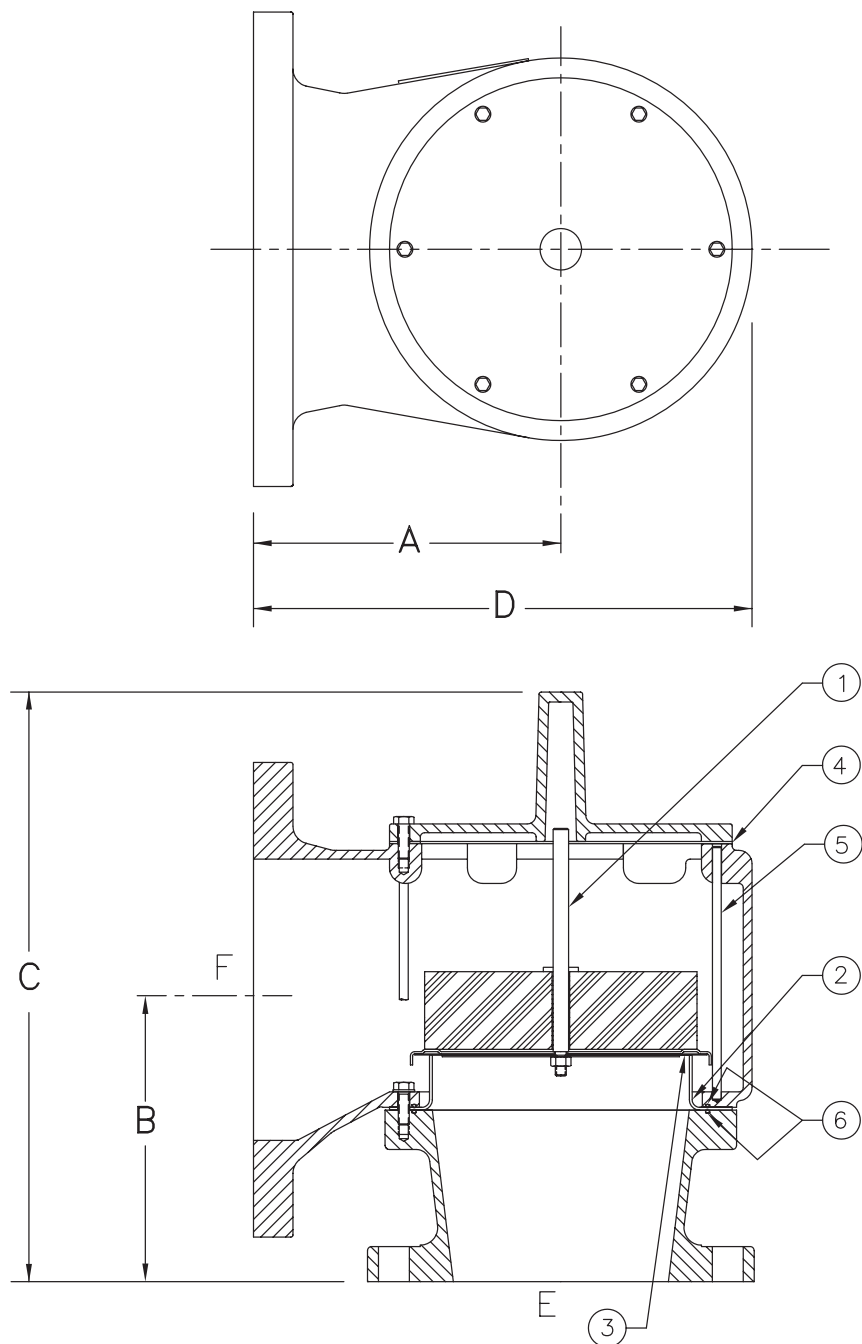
MODEL 3650B PRESSURE OR VACUUM RELIEF VALVE (LOW SETTING) DRILLING PER ANSI CLASS 125 F.F.
